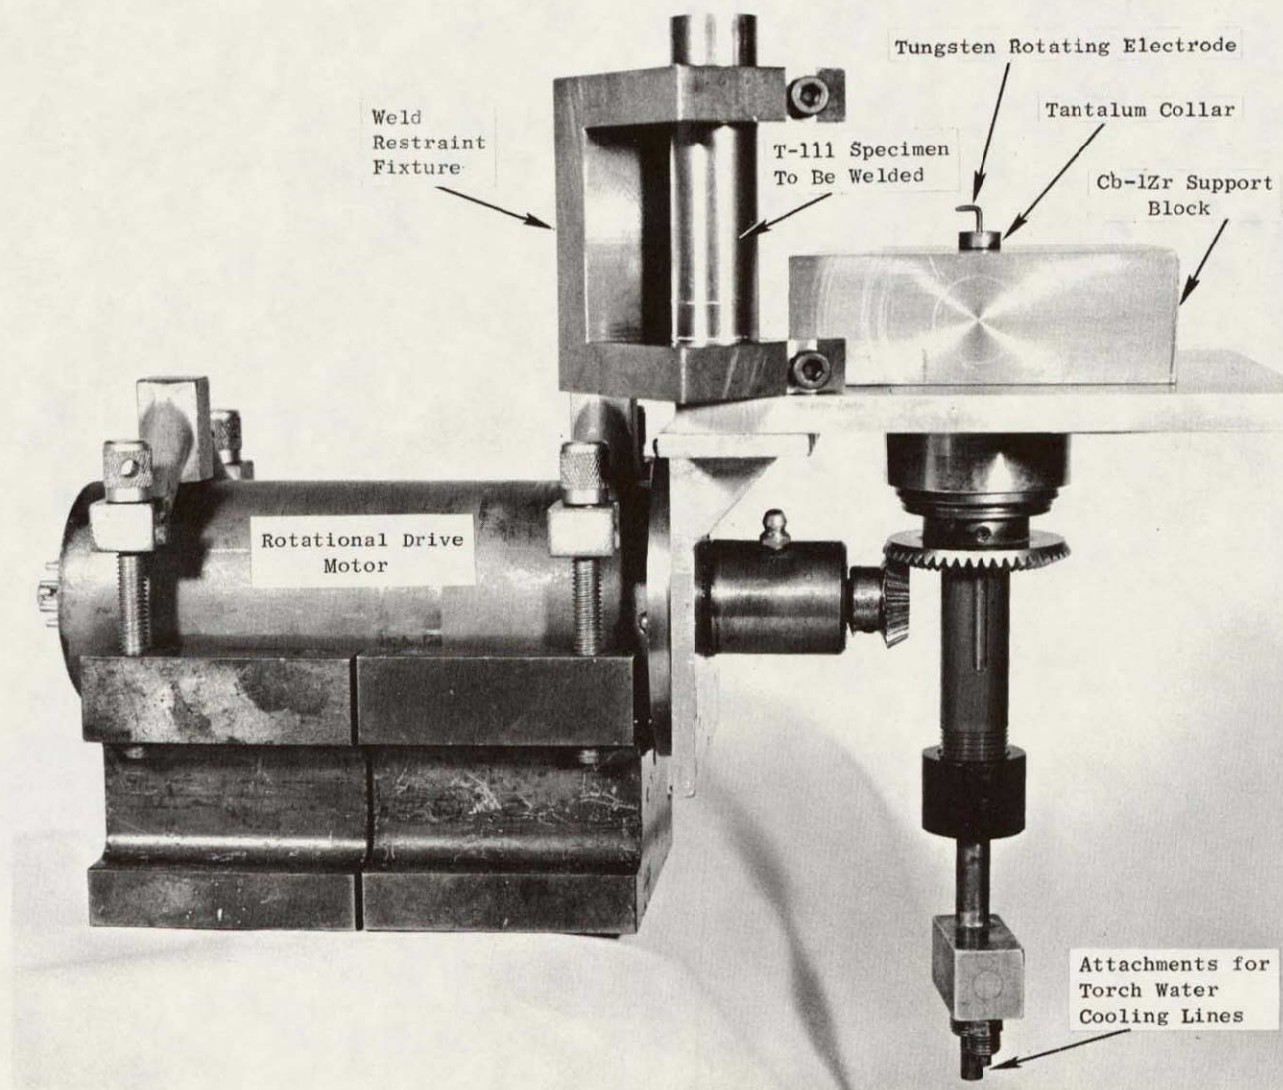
Tube-to-Header GTA Welding Setup with Drive Unit for Electrode Rotation—Before Positioning Specimen and Tantalum Restraint Fixture in Place for Welding. (70-6-13D)
